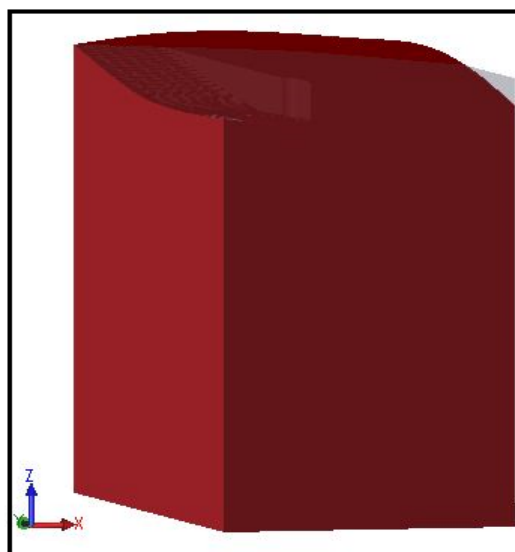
Output of part 2 using 3-axis machining simulation.
